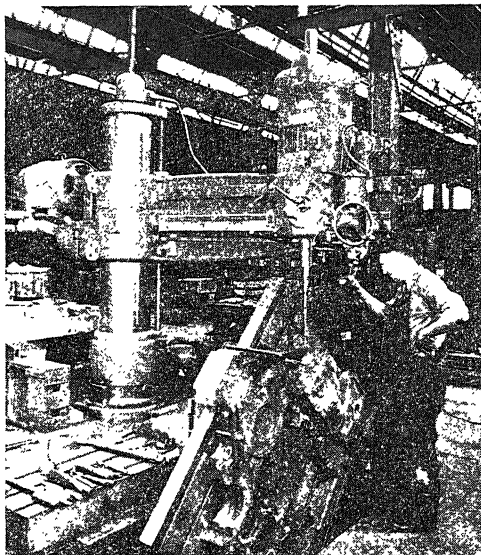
A special job in a 6-ft. radial drill. (*Courtesy of The American Tool Works Company.*)
